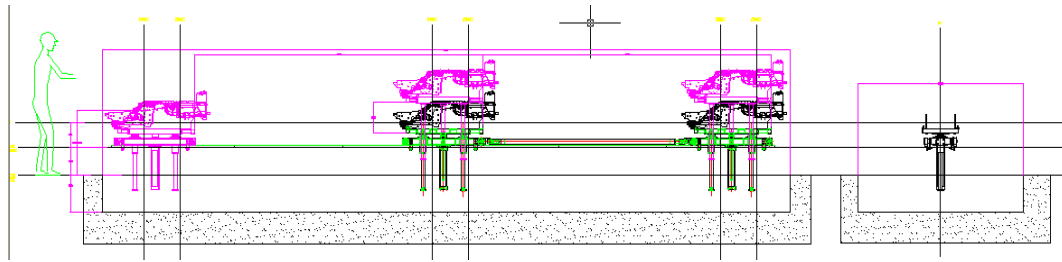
Structure Design of Floor Assembly Welding Production Line
